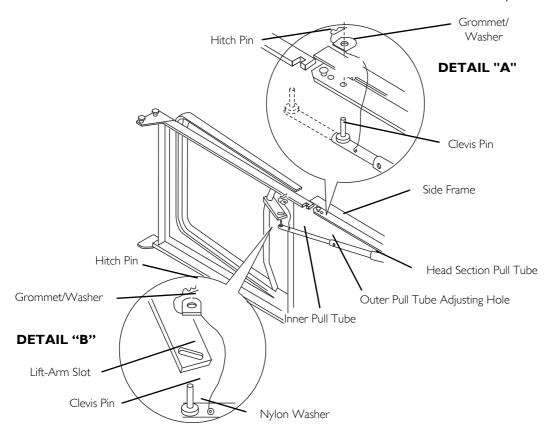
Adjusting and Reconnecting the Head Section Pull Tube
